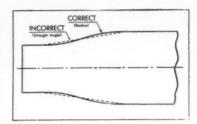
Pointed end of tube must be opened to permit a free flow of both acid and lubricant,
